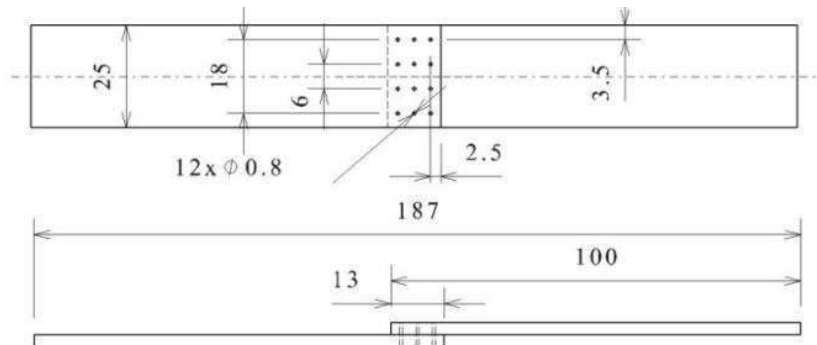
Geometry and Dimensions of Single-Lap Joint (all dimensions in mm)
